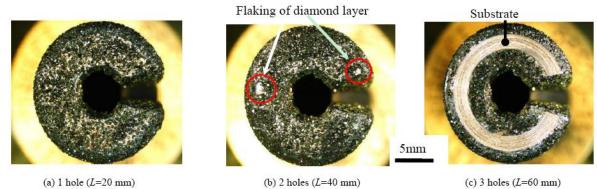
Tool wear of the drill tip in drilling WC-16mass%Co cemented carbide with a V-shaped groove (L: drilled hole length).
